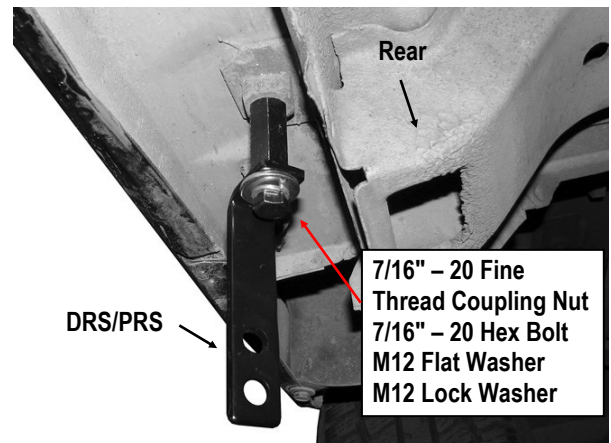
Thread The 7/16" – 20 Fine Thread Coupling Nut Onto Threaded End Of Seat Belt Bolt
